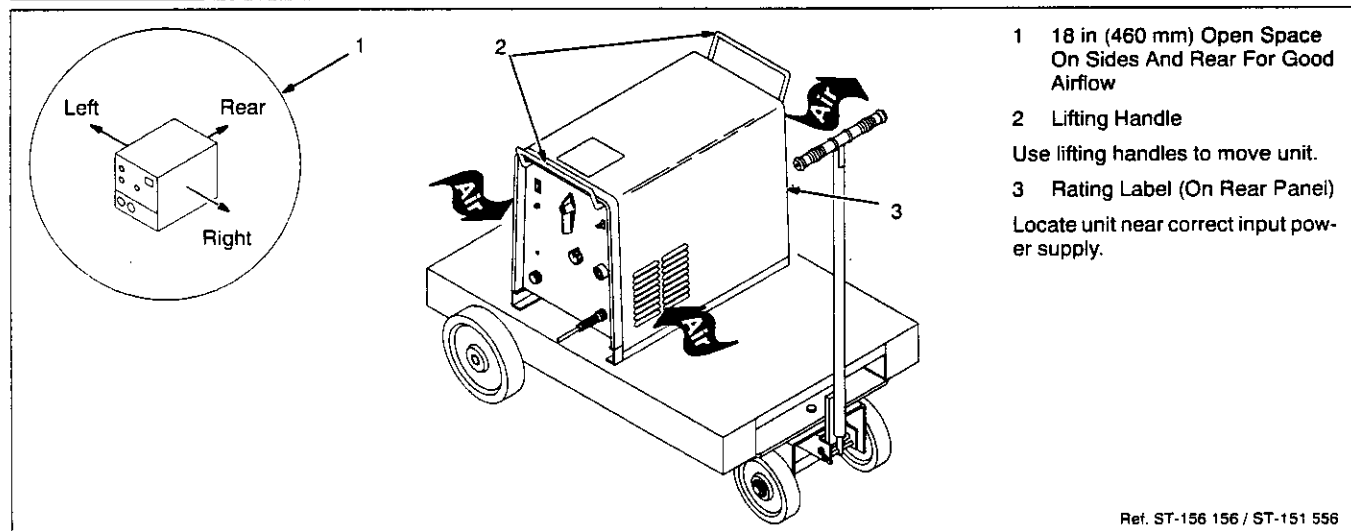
Location and Movement Of Welding Power Source
